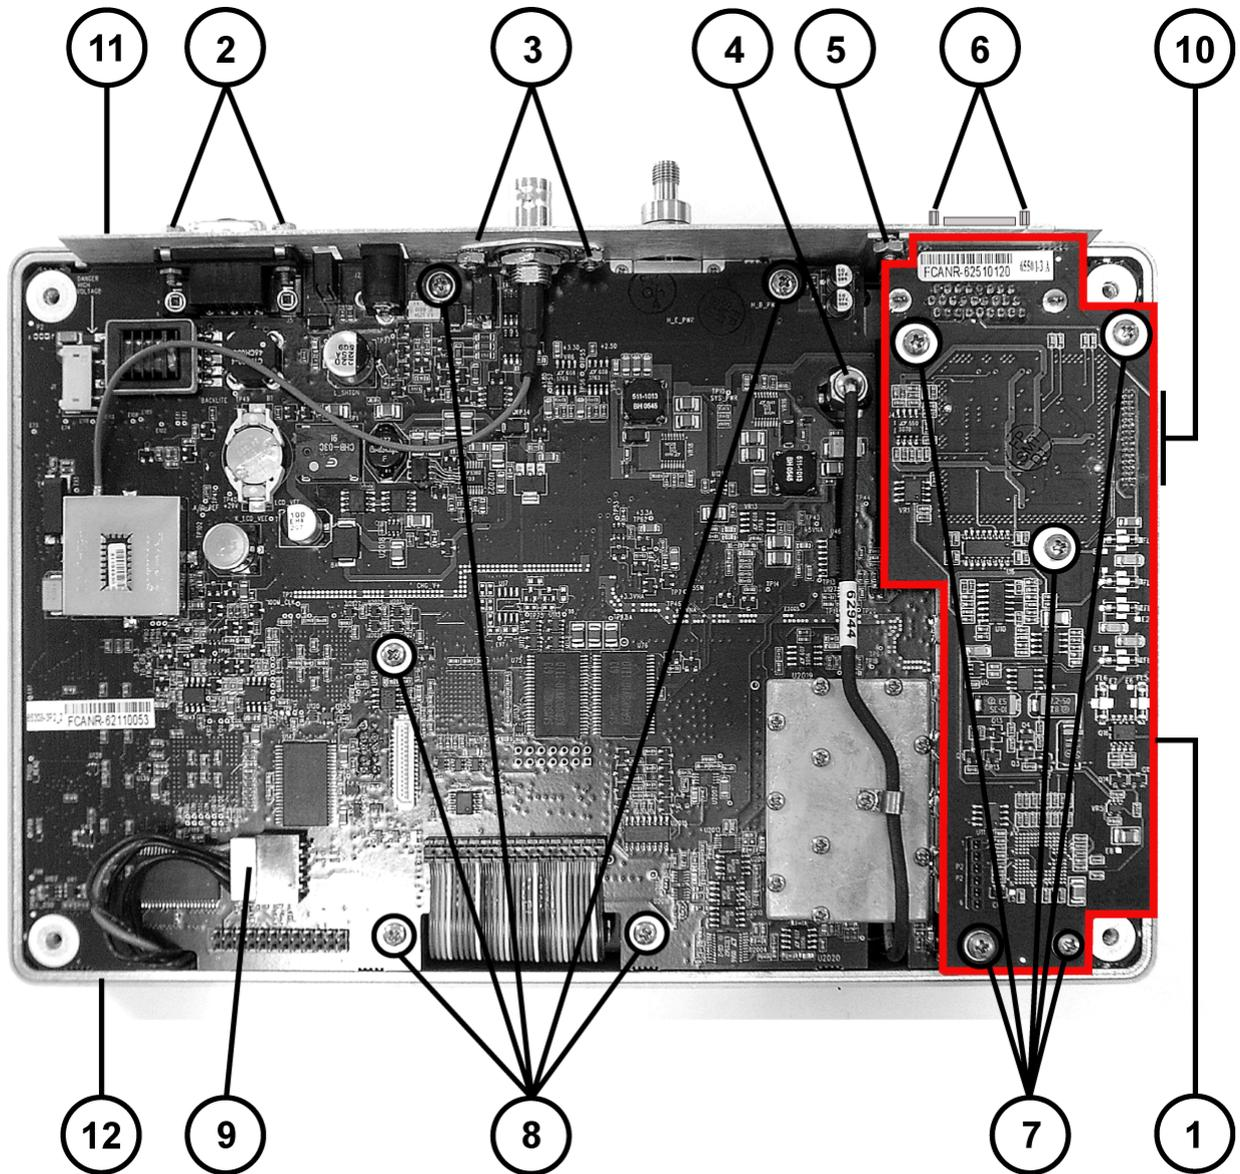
Main PCB Assembly and Option 22 CW Source Control PCB Assembly
